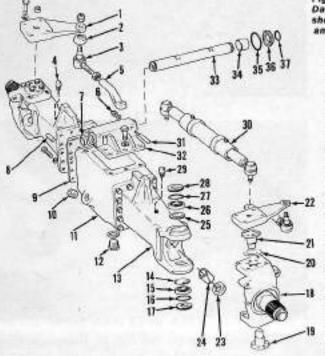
Exploded riew of David Brown front drive exic showing component parts and their relative positions.
